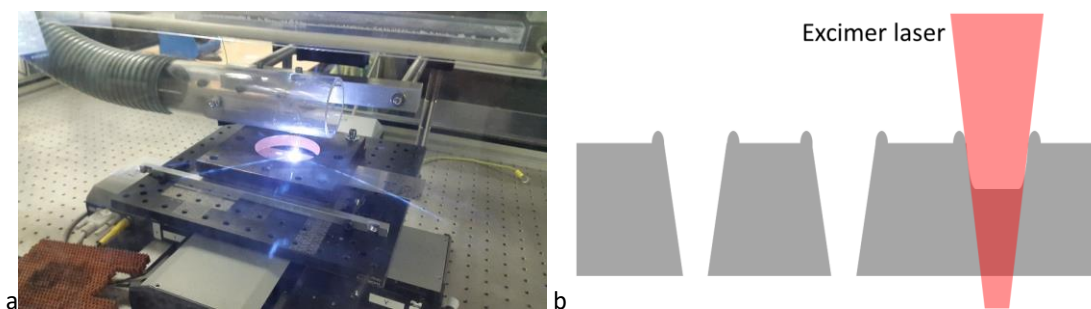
(a) Laser drilling of holes with Excimer UV laser at the Delft Sirius Laser Facility (b) Sketch of the conical laser beam drilling holes through an aluminum plate, creating larger holes on the top side and smaller holes on the bottom side. On the top side material builds up around the hole.
